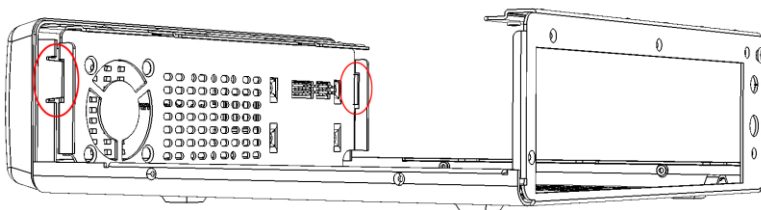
Removing the front plate by pressing the left and right plastic lids
